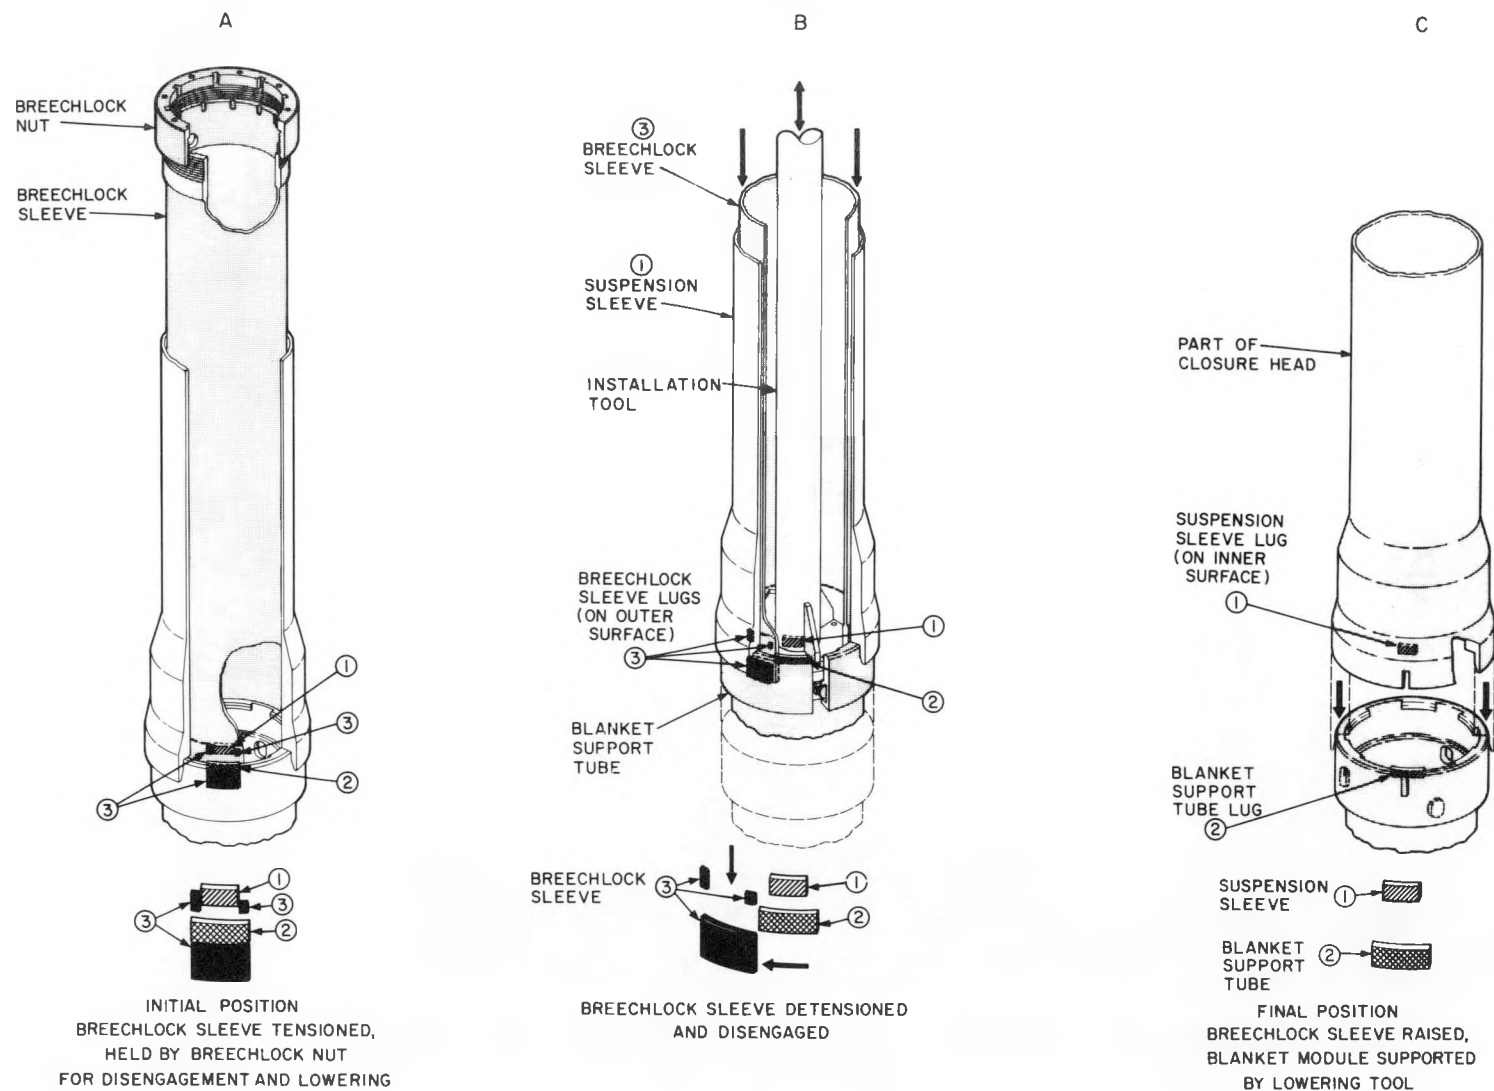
Blanket Module Suspension System Showing Lug Positions for Disassembly
